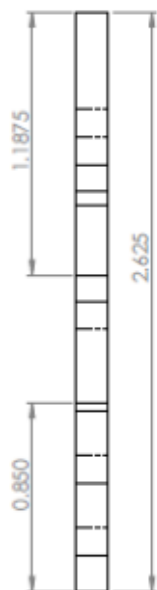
Front view of part 2 of the reference electrode fixture. Dimensions are in inches.
